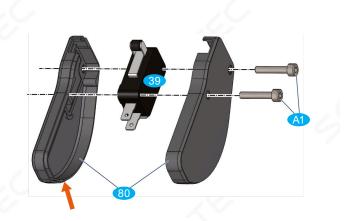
Housing with reference switch. The red arrow indicates the cut-out for cable entry
